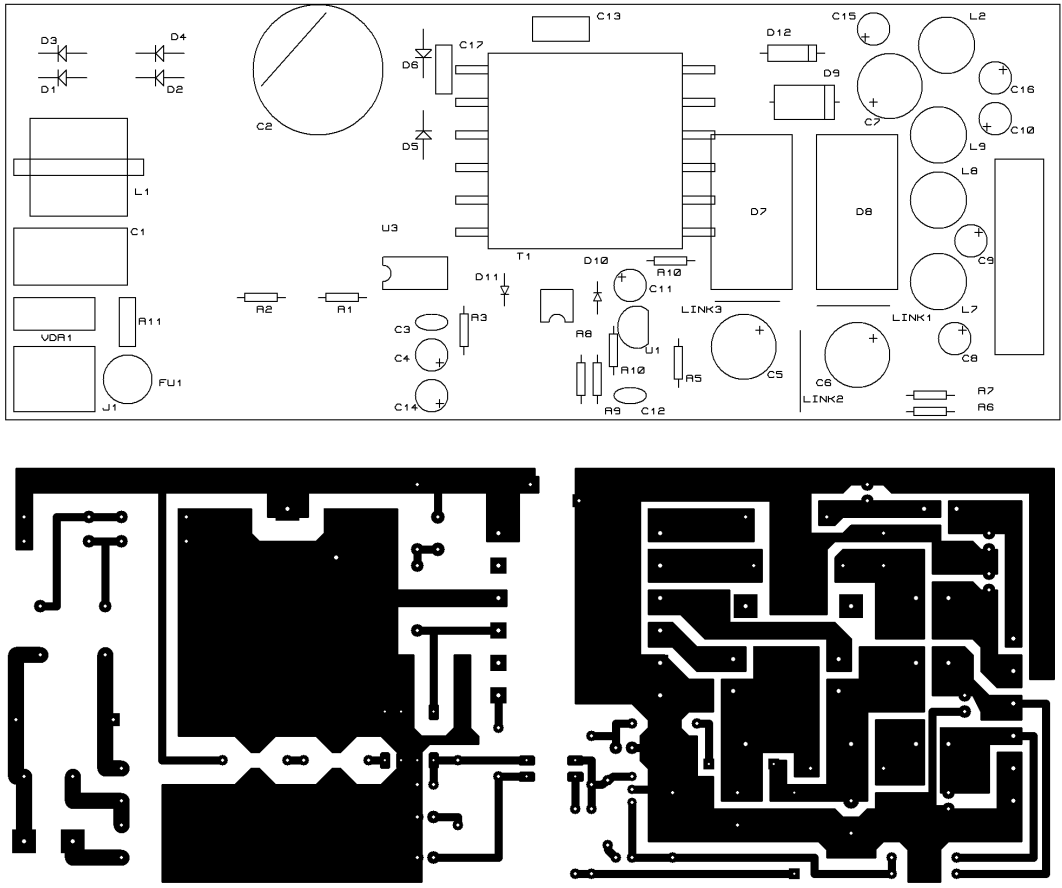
Printed Circuit Layout (Scale not 1:1)
